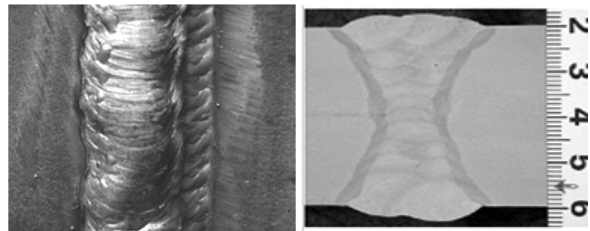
Vertical-up position weld, (a) bead appearance and (b) macrostructure
